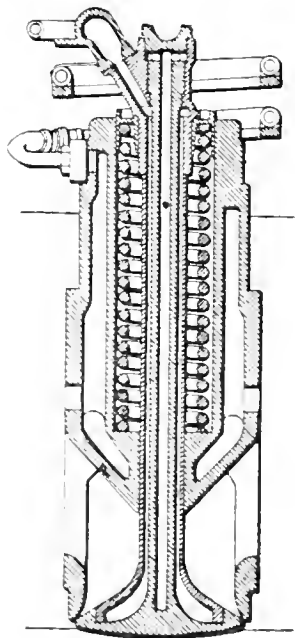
VALVE AND VALVE CAGE IN TOSI SUBMARINE DIESEL ENGINE
